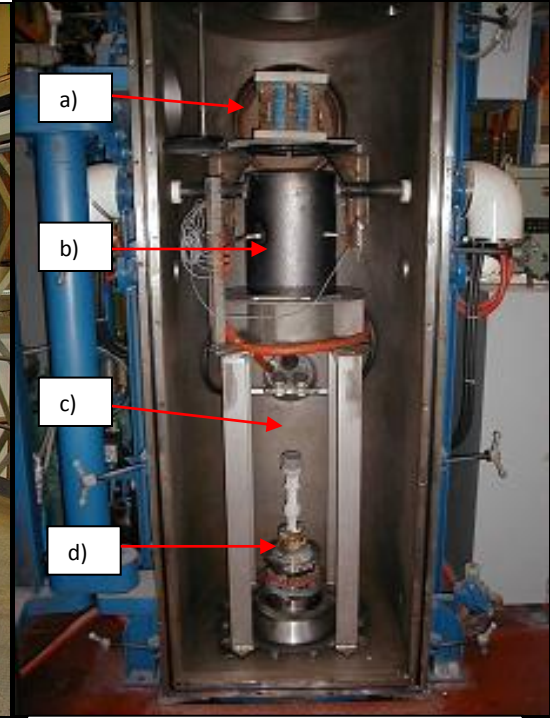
Inside the furnace: a) melting coil; b) hot zone; c) cold zone; d) mould and chill plate.
